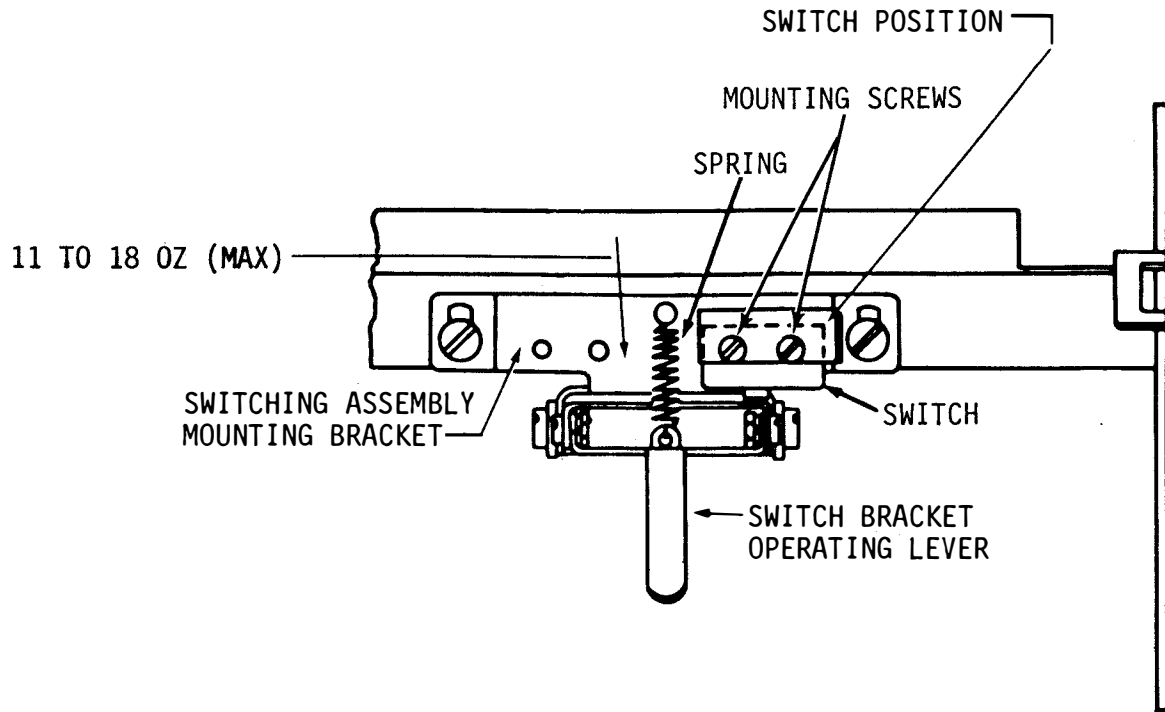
Switch Position and Switch Bracket Spring, Rear View
